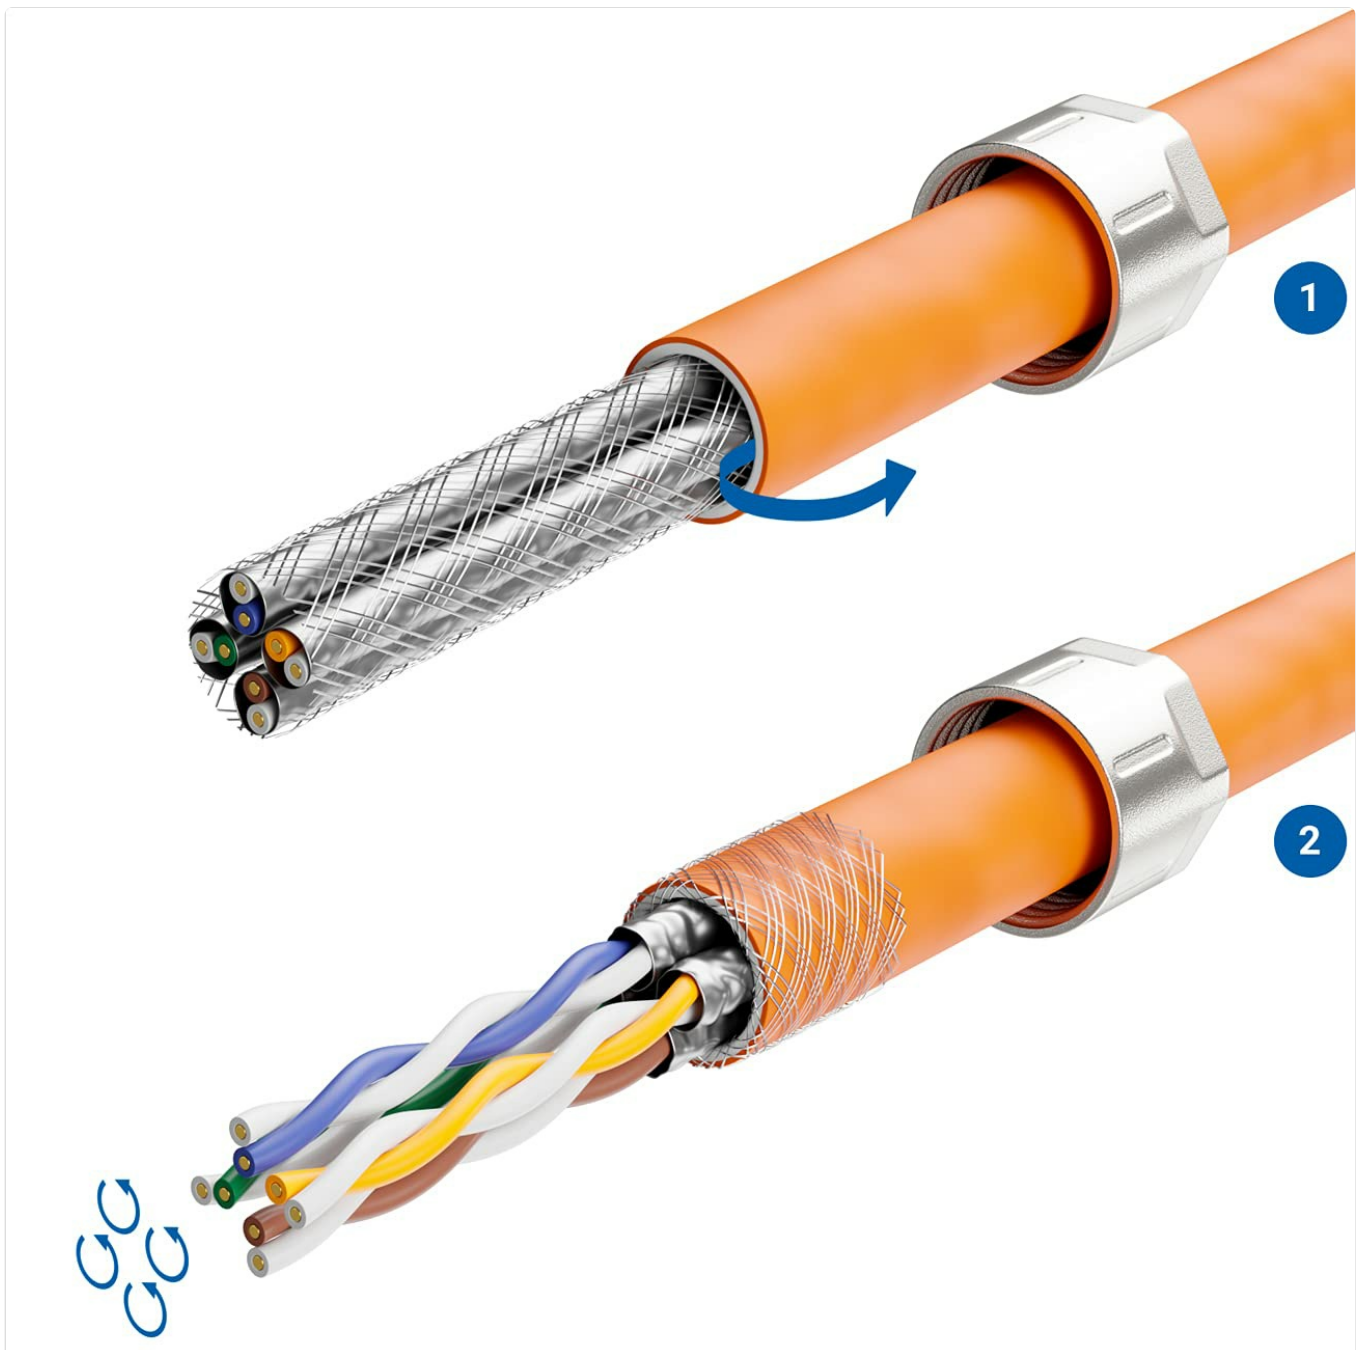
of cable preparation, showing the outer jacket being stripped and the braided shield exposed. The screw cap is already on the cable.
